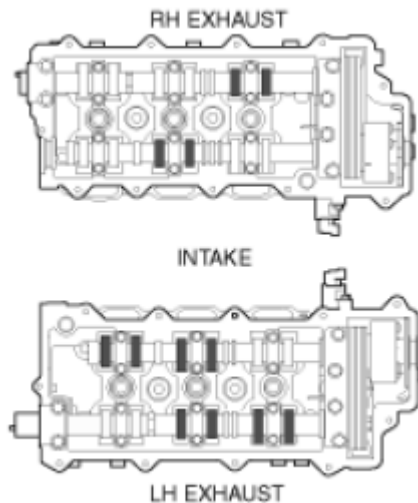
Identifying Intake And Exhaust Valve Clearance
